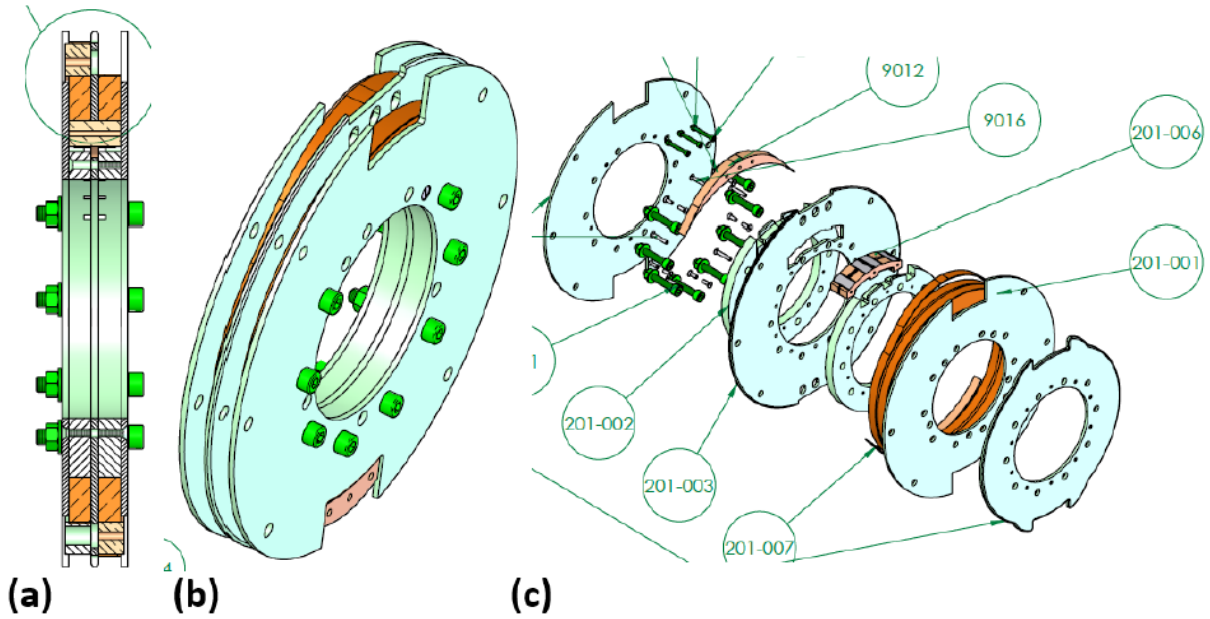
a) Sectional view of a double pancake. b) Drawing view of a double pancake. c) Exploded view of a double pancake.
